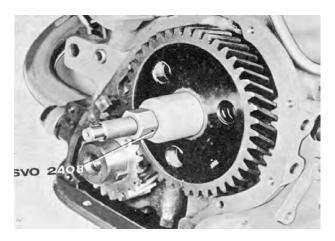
Fitting the camshaft gear(4-cyl. engine)
